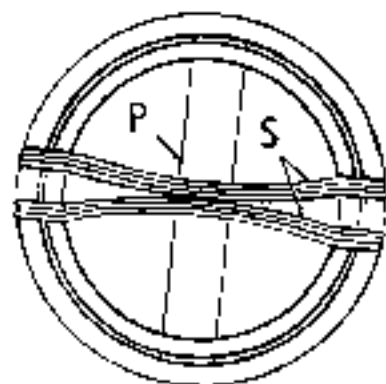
A—Schematic and view of steering control sleeve and spool showing correct assembly of centering springs (S) and drive pin (P).
